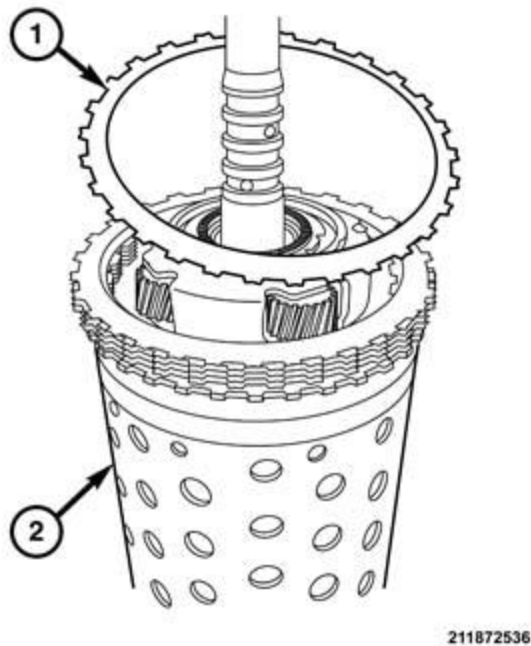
Annulus Assembly & B-Clutch Wave Plate
